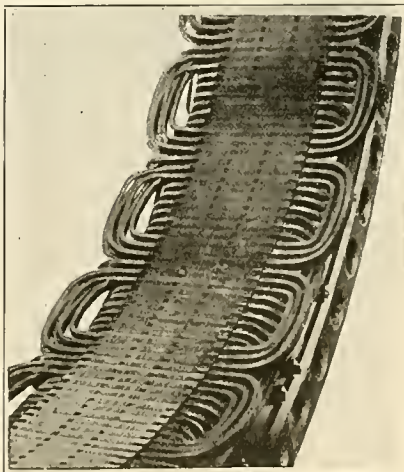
CHAIN WINDING OF ALTERNATOR.
